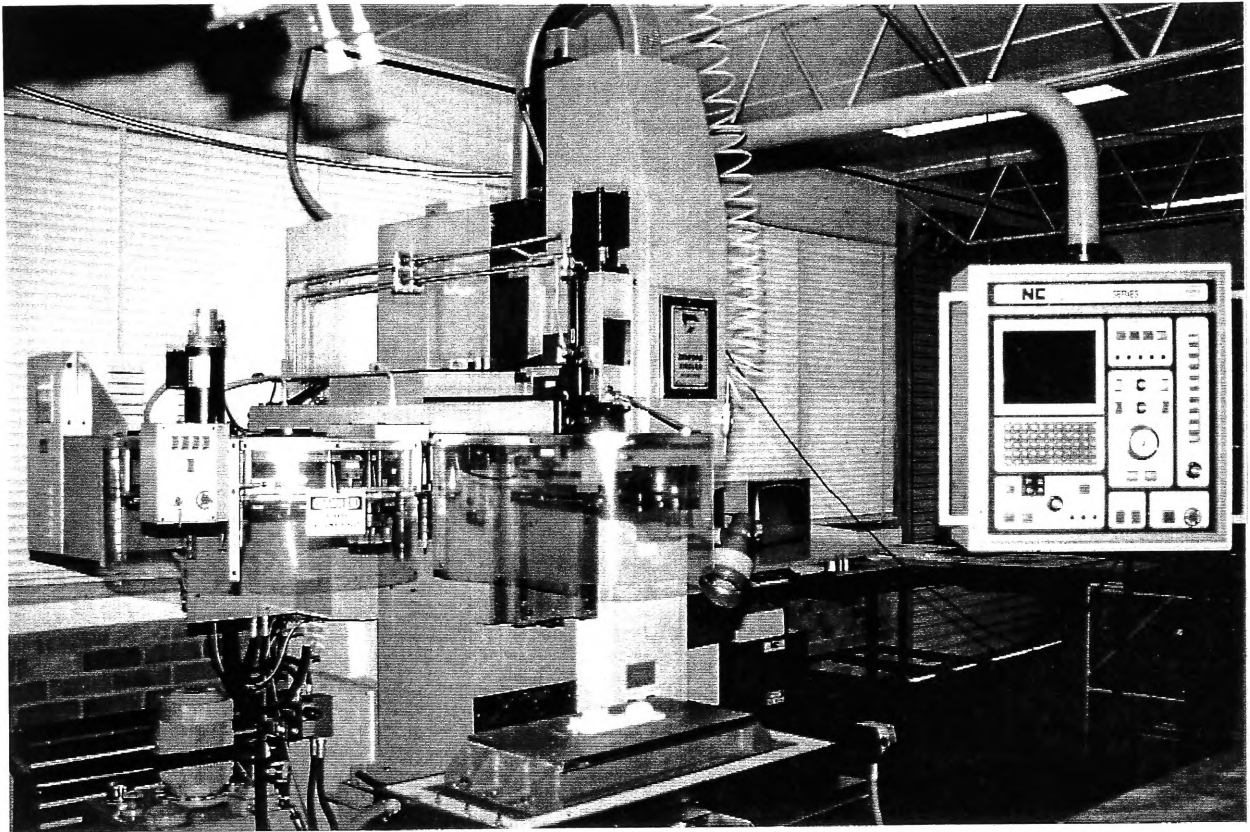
Zenford Ziegler CNC Machining Centre.
